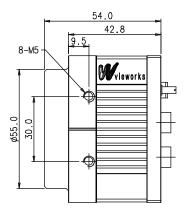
VH-5MC Mechanical Dimension (C-Mount)
